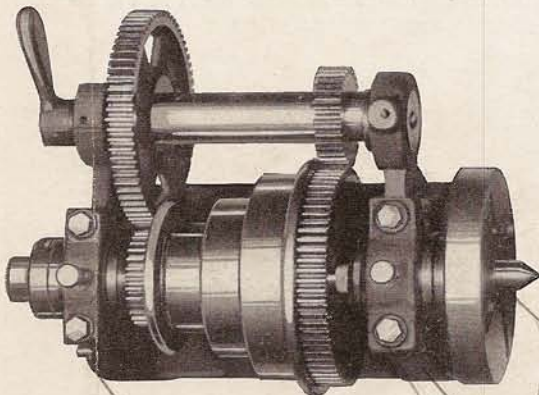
Top View of Back Geared Head Stock with Gear Guards Removed Showing Back Gears
